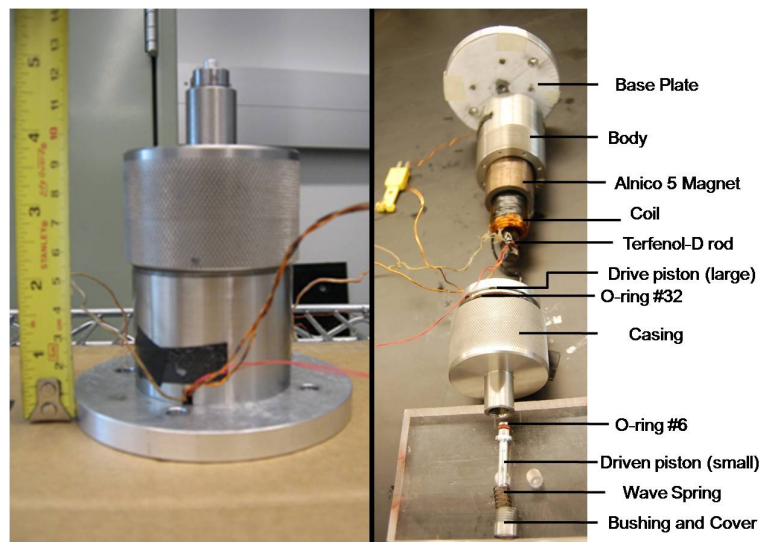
Assembled and exploded view of the Magneto-Hydraulic Actuator.
